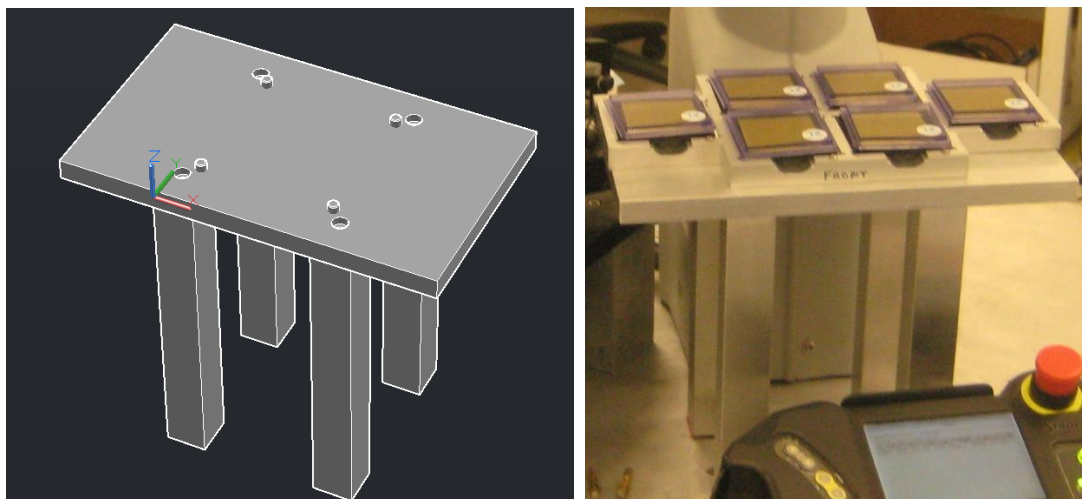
On the left, is an AutoCAD drawing of the Ring Pack. On the right, is the actual manufactured Ring Pack from Groth Engineering with a sample Ring Pack placed inside.
